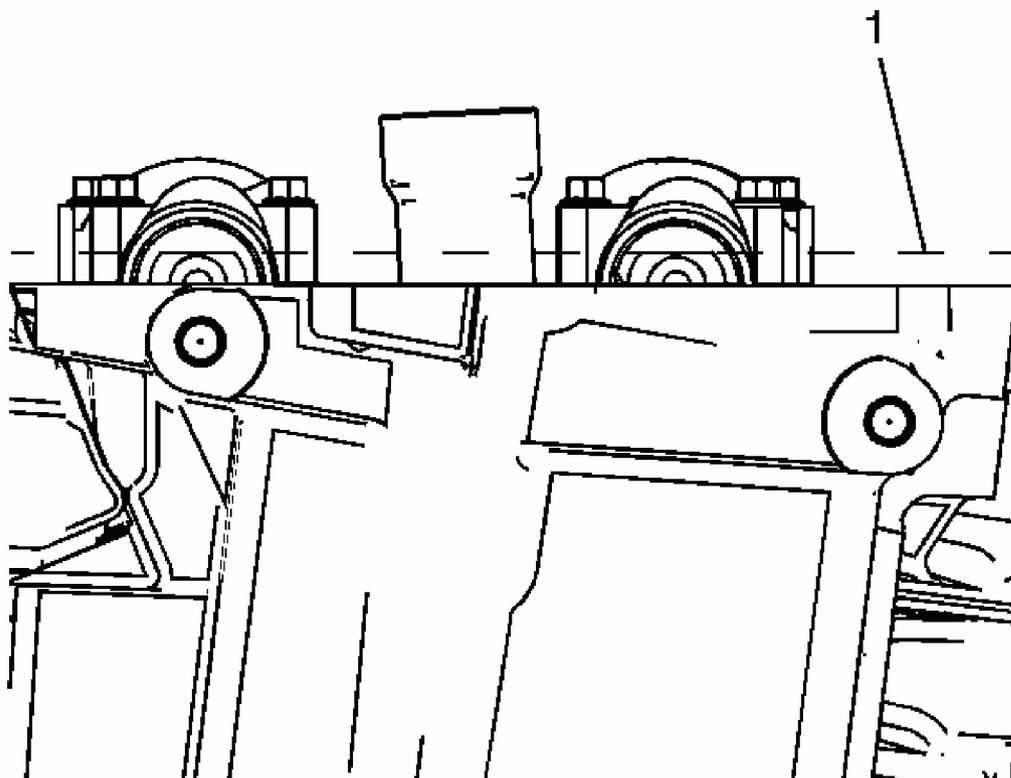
Identifying Camshaft Neutral (Low Tension) Position
